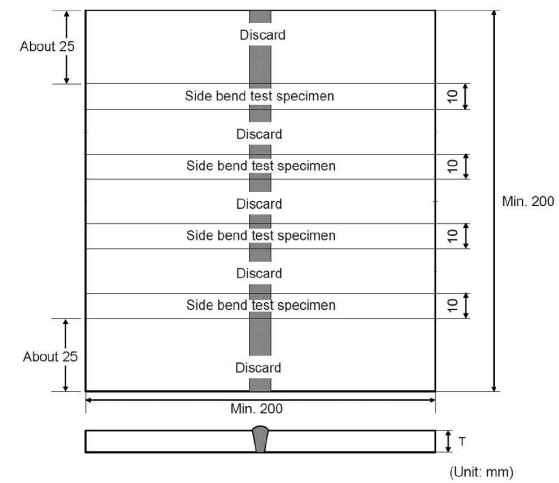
Dimensions and types of test assembly for butt welds (T ≥ 12mm)
